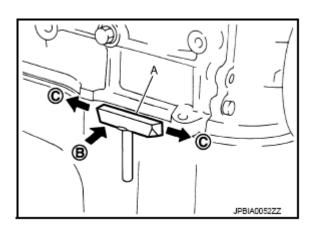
Separating Mating Surface Using Seal Cutter Courtesy of NISSAN NORTH AMERICA, INC.
